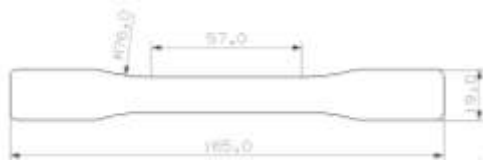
Dimensions of specimen (thickness = 3.17mm)
